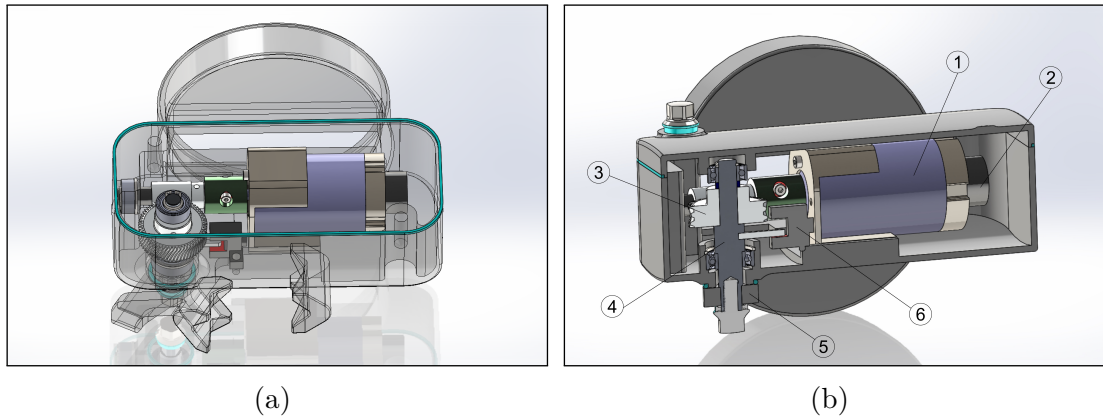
(a) Overall view of end-effector internal components. (b) Sectioned illustration of motion transmission: (1) motor, (2) encoder, (3) worm gear drive, (4) output shaft, (5) claw, (6) photocell limit switch sensor.
